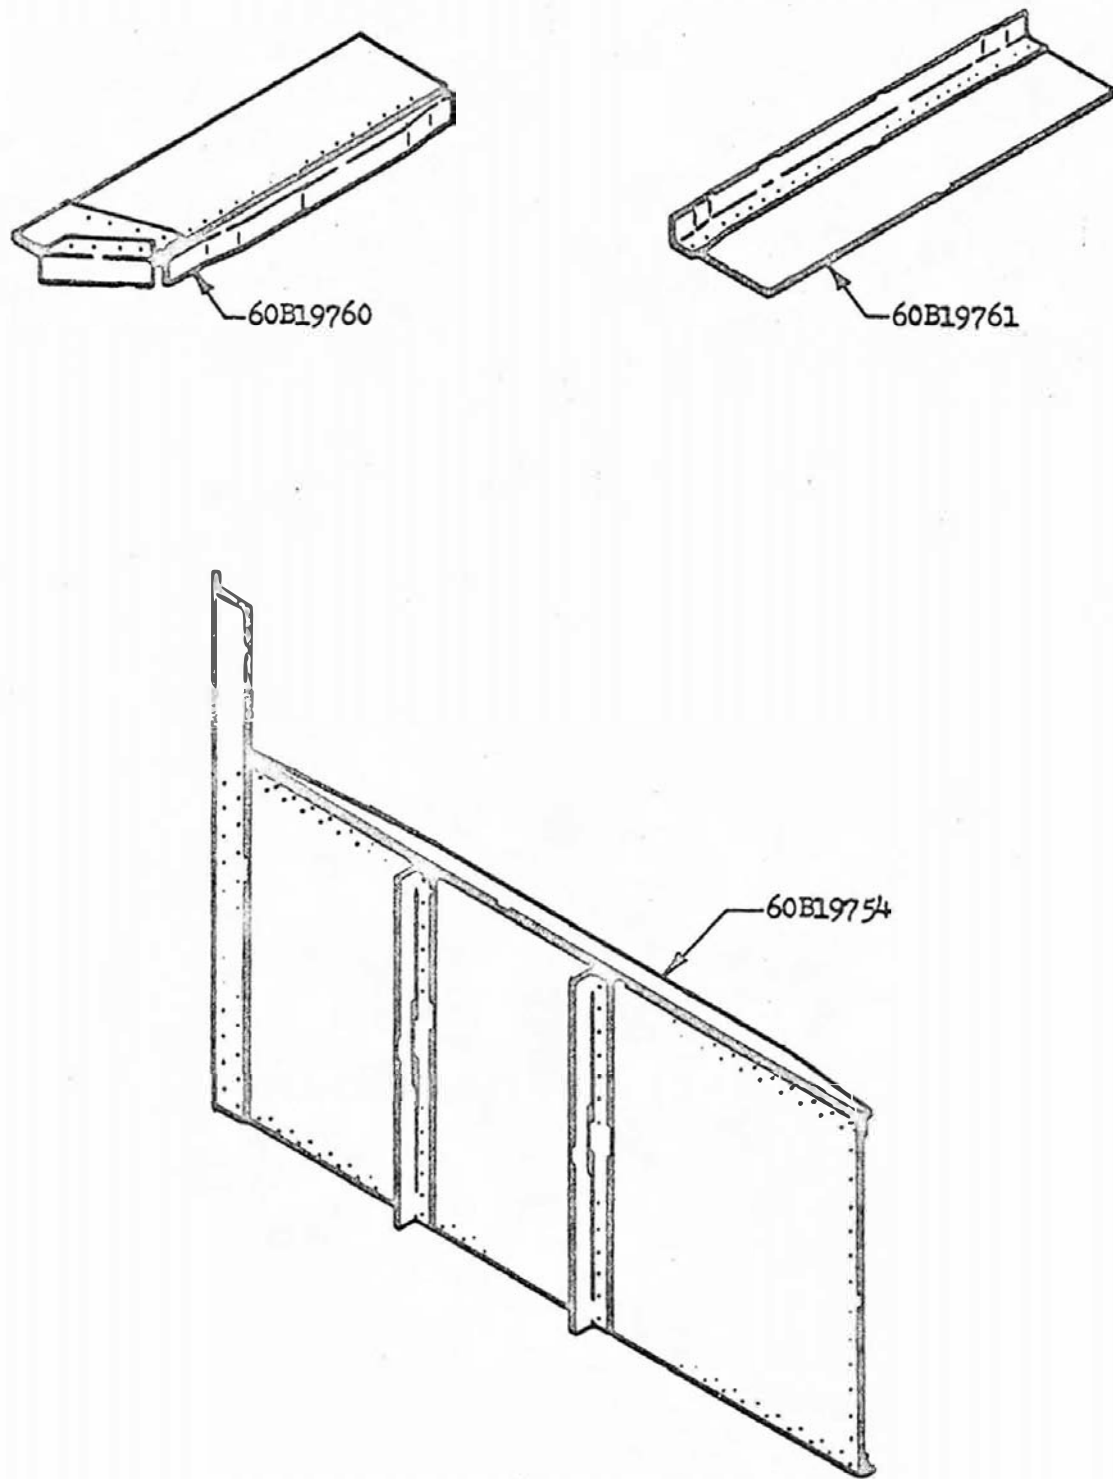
Canted Bulkhead Assembly 60B19754, Web Assembly 60B19760, and Web Assembly 60B19761
